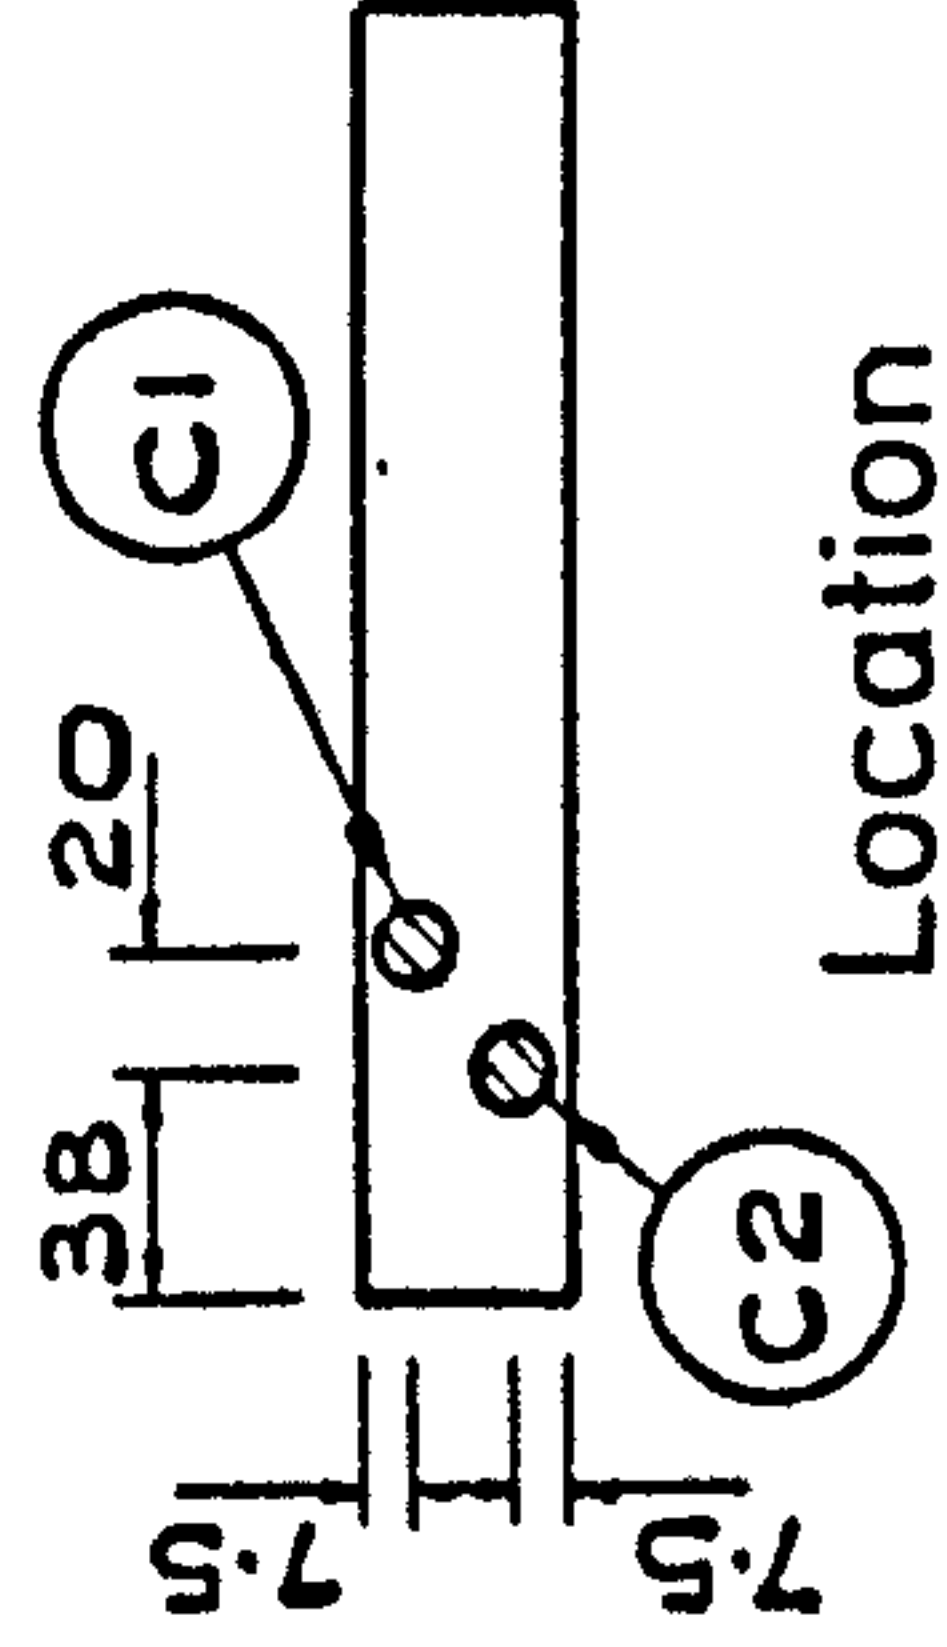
LOCATION AND DIMENSIONS OF STEEL COUPONS
